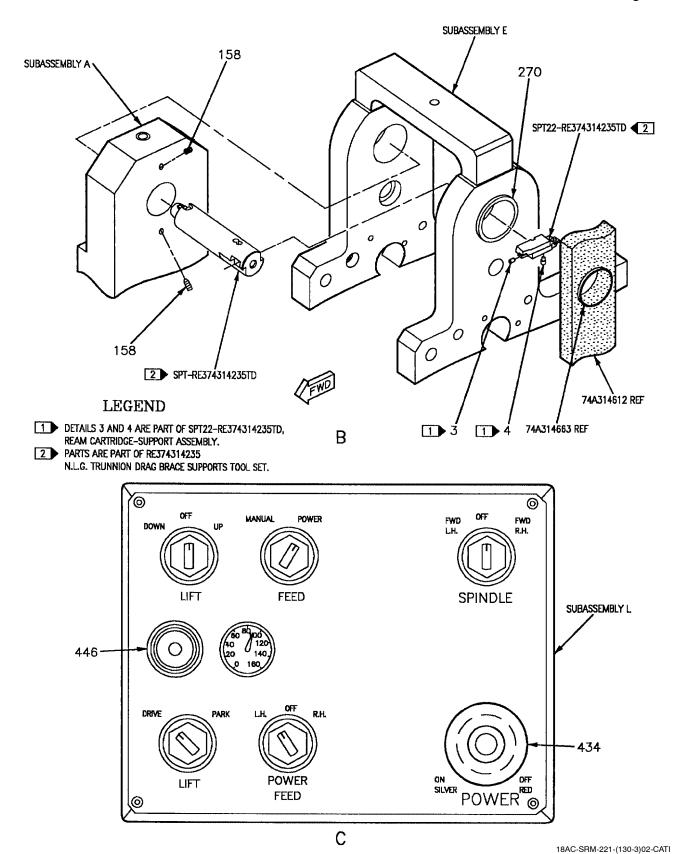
Support Final Reaming After Cold Working (Sheet 3)
